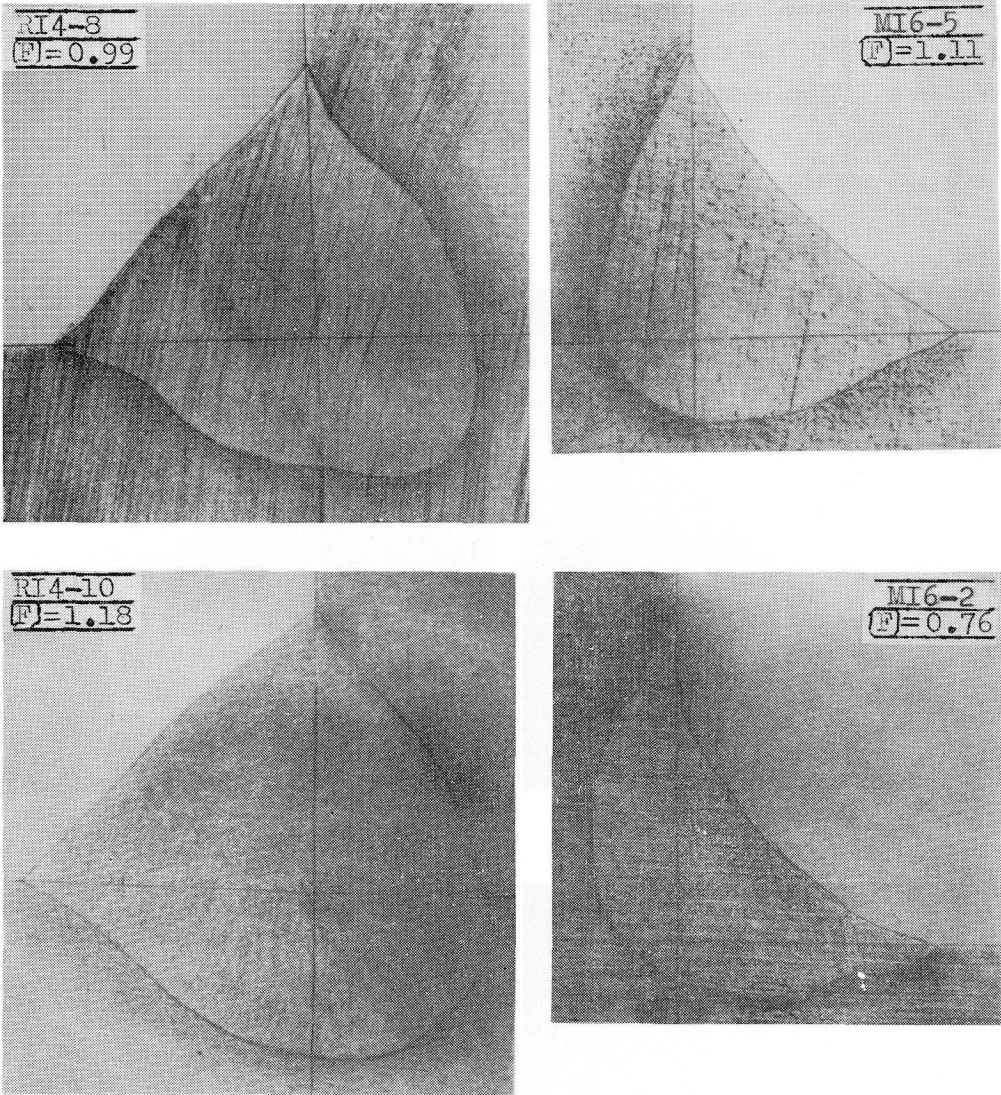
(2) Examples of macro-etching cross-section of fillet weld
